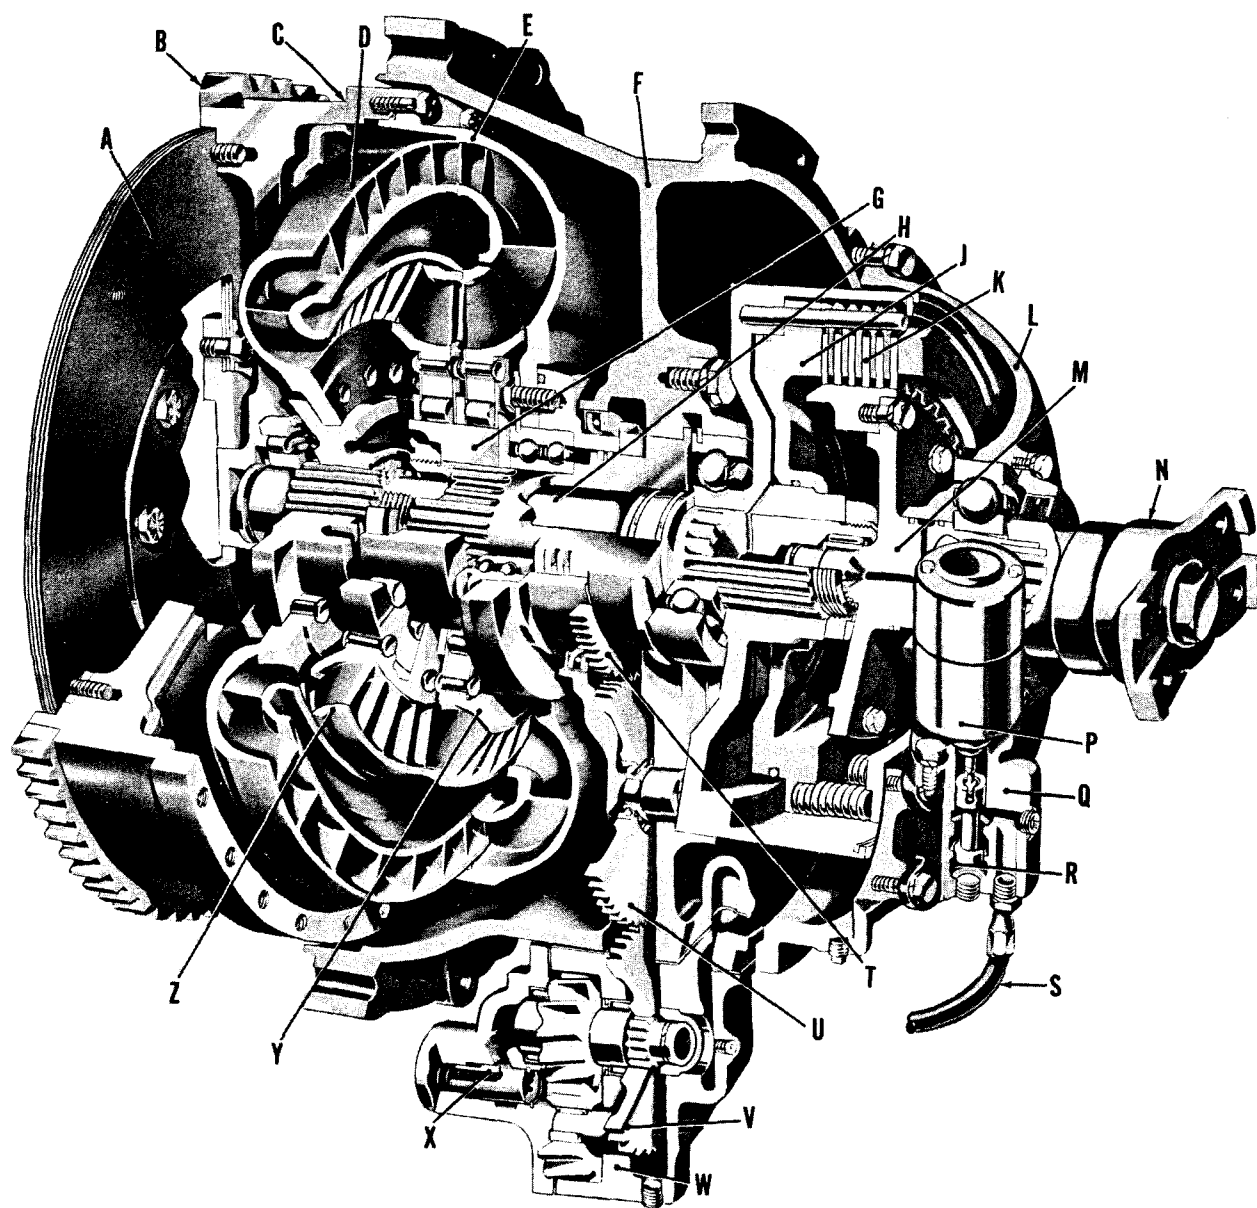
TCRD Torqmatic converter with hydraulic rear-disconnect clutch — cutaway view
